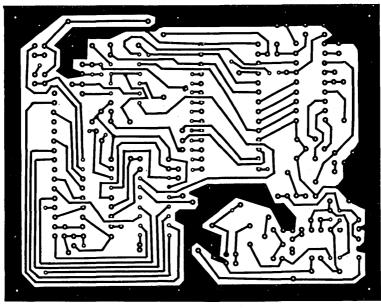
PC Board for 3 3/4 and 3 1/2-Digit DPM (Shown 1/2 Size)
